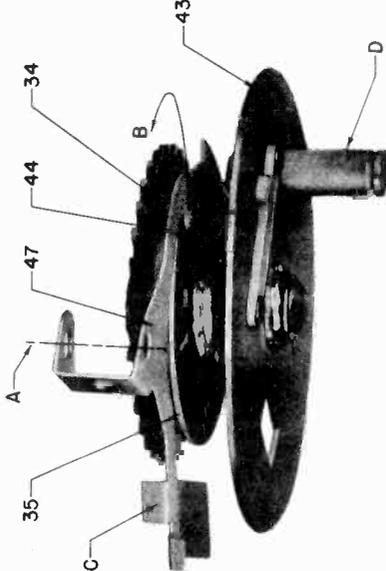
Clutch Assembly with Pawl (44) Engaged
